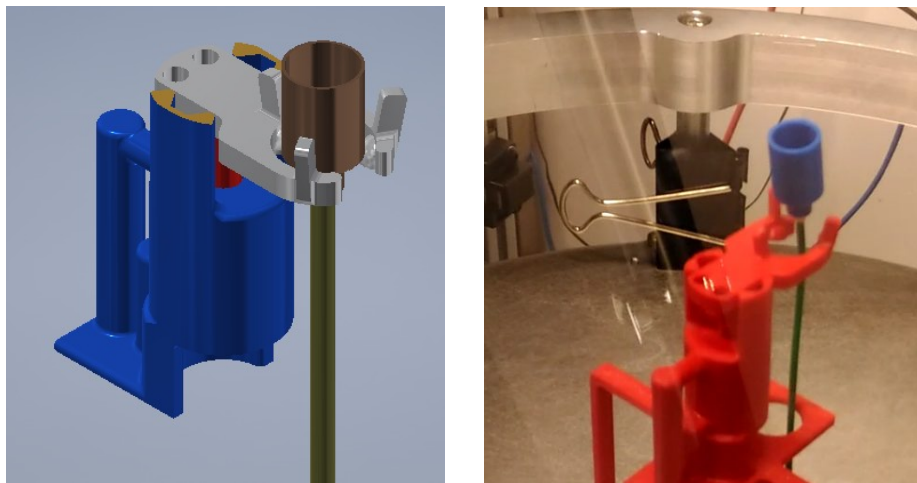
Design (left) and prototype test (right) for pneumatic Starbug cradle assembly with simulated Starbug.
